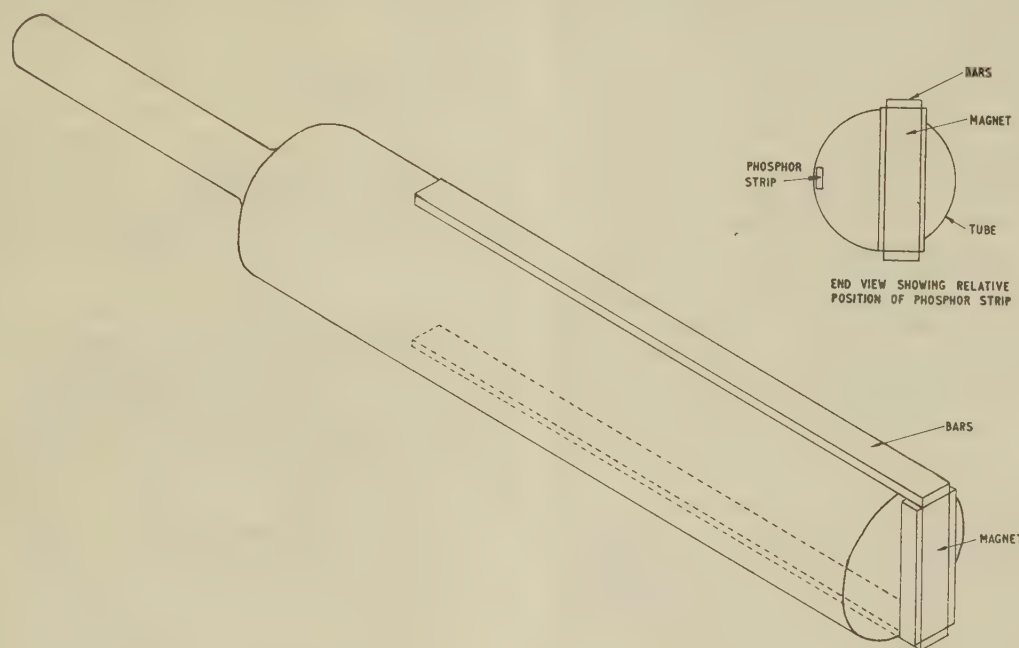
Permanent-magnet assembly used with the banana tube.
